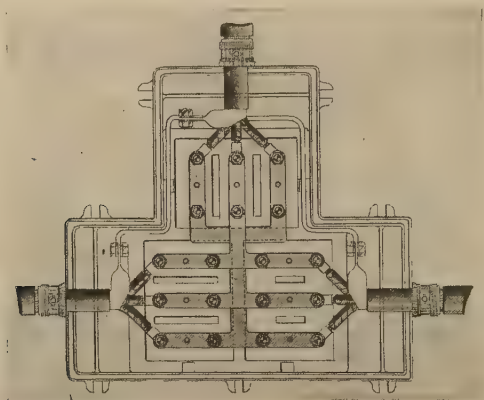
Plan of three-way disconnecting joint-box, for three-core cables.
